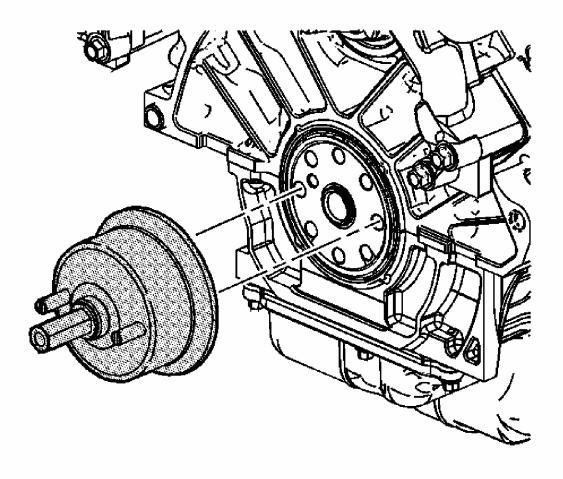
Removing J 45930-A Seal Installer Courtesy of GENERAL MOTORS CORP.
